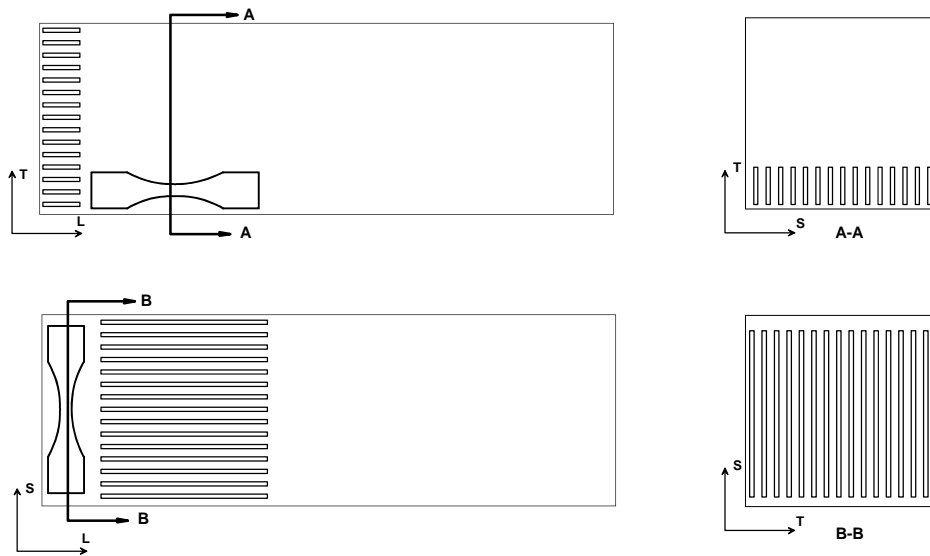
The Location and Orientation of Fracture and Tension Specimens, With Respect to the Forging
